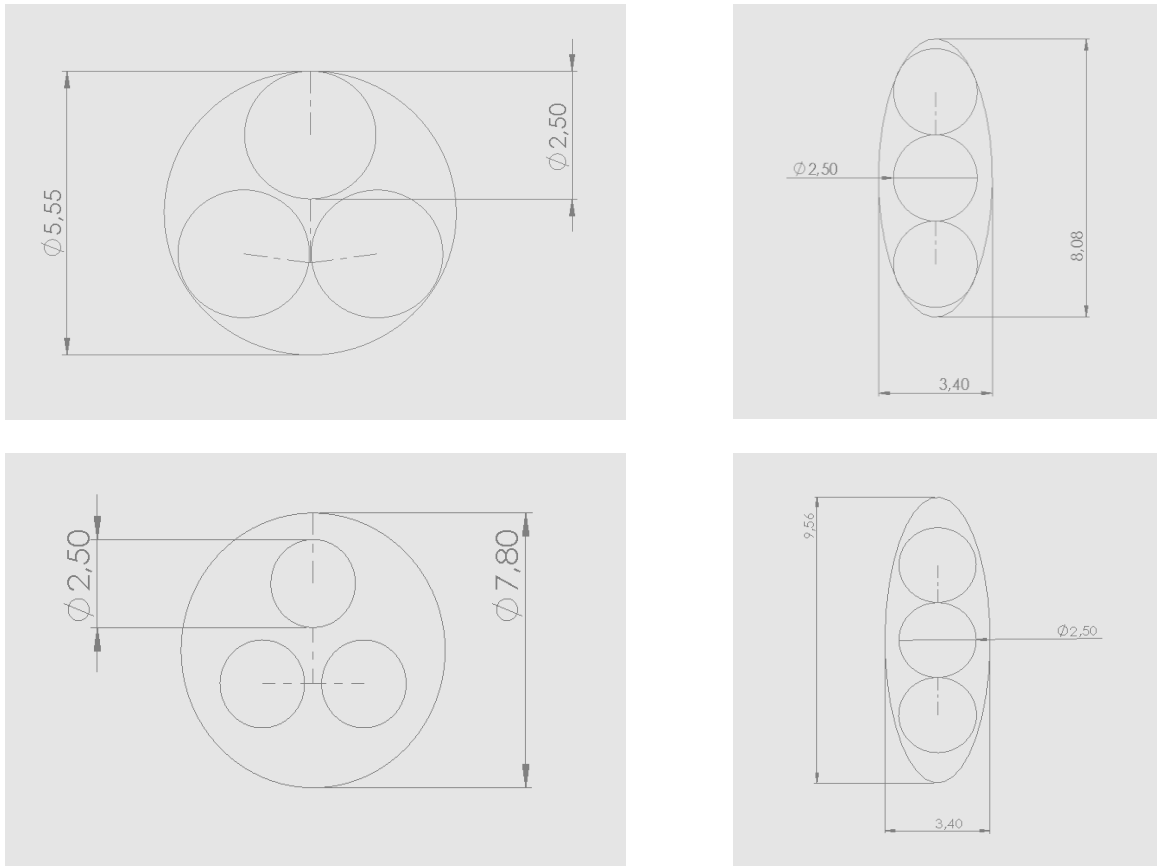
Drawings of the sting hole section with the cable inside. On the top scale 1:180, on the bottom scale 1:80.
